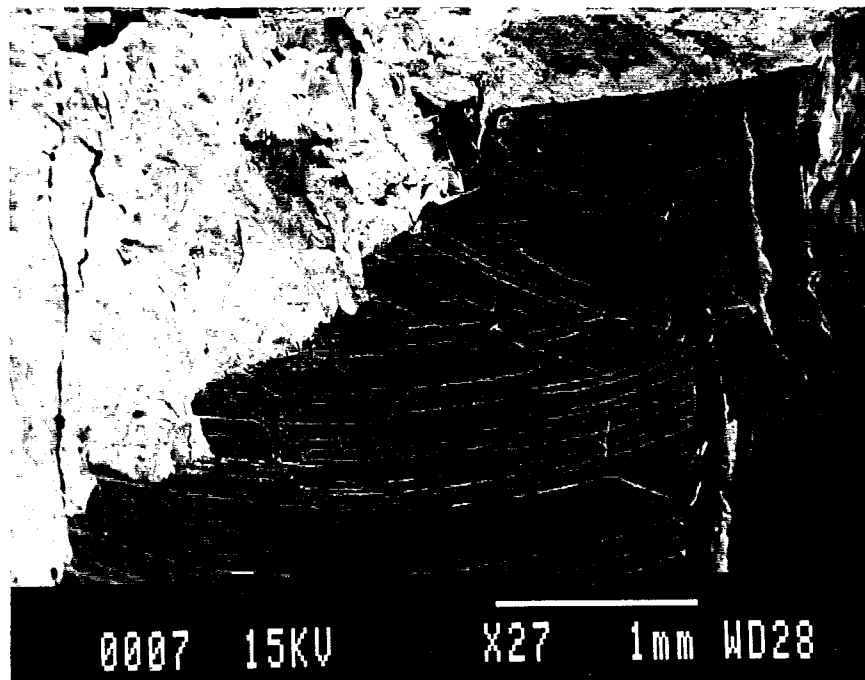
[111] crystal - fracture surface and slip plane markings.
